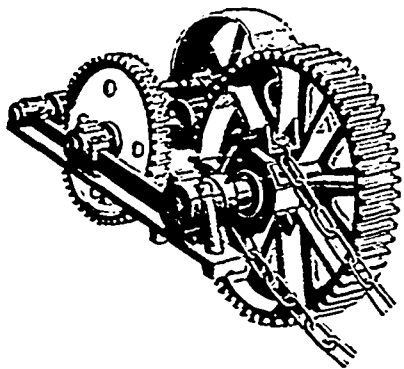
LOG JACK AND CONVEYOR CHAIN.
